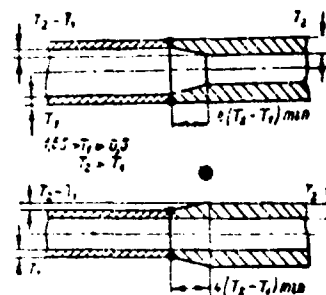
Recommended structures of butt-welded pipeline joints.
